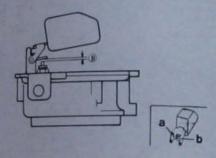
Opening clearance adjustment - Hitachi carburettor (Sec 12)
